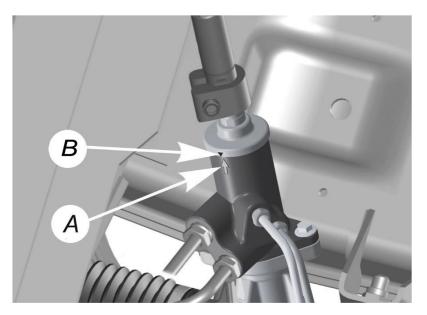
Adjustment marks on the steering gear: A – mark on the distributor housing (arrow cast on the distributor housing); B – mark on the input shaft cover
